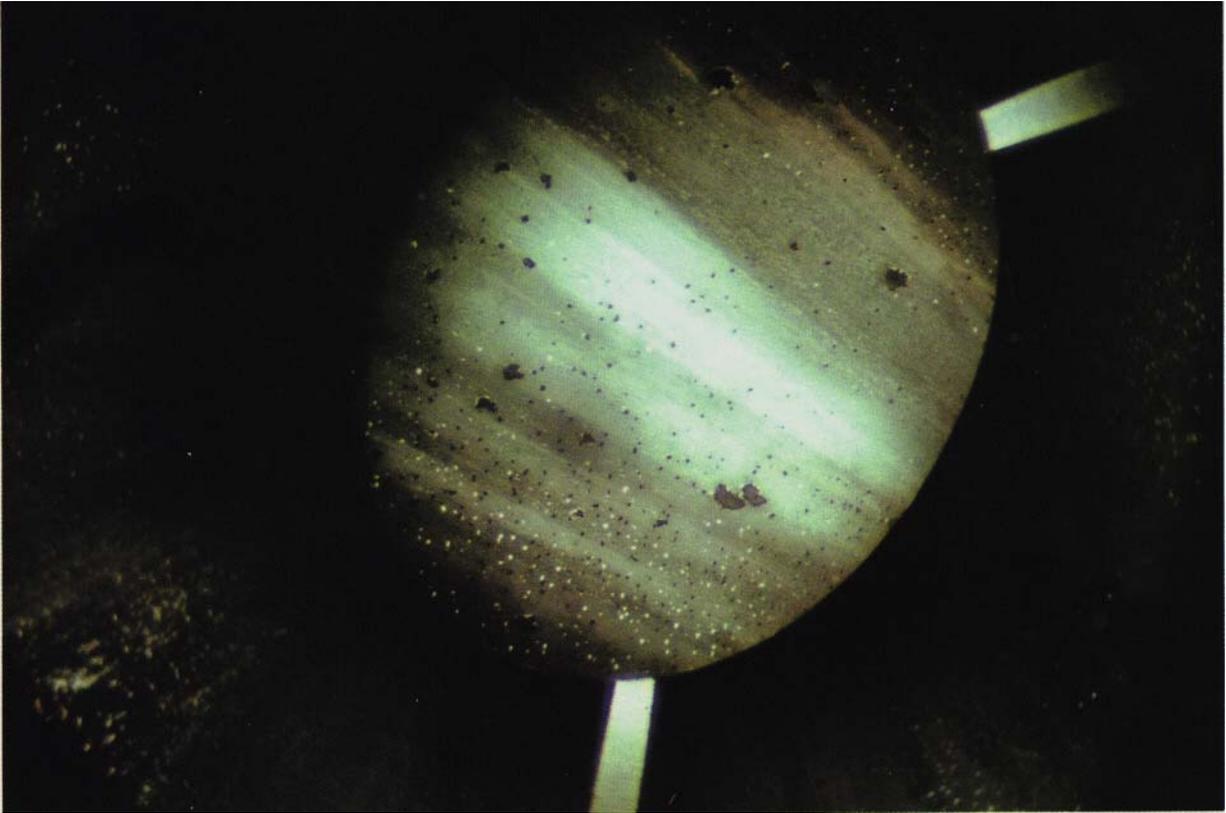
120MM M256 Tube: Light chrome pitting and chipping of bore.
